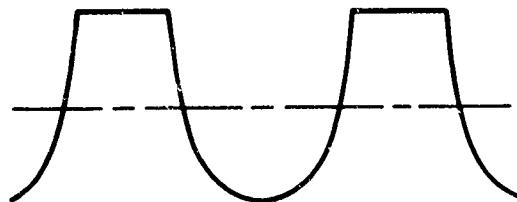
ALL-DEDENDUM GEAR TEETH
